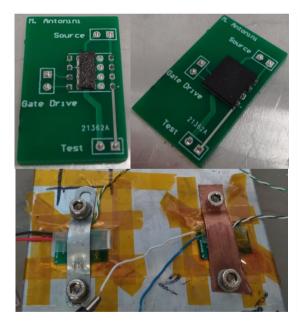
Pictures of the board. Complete (top, left); before mounting the GaN transistor, to see the graphene foam (top, right); the assembly under measurement (bottom), the sample mounted with graphene foam on the left, and the one attached with SnAg on the right.
